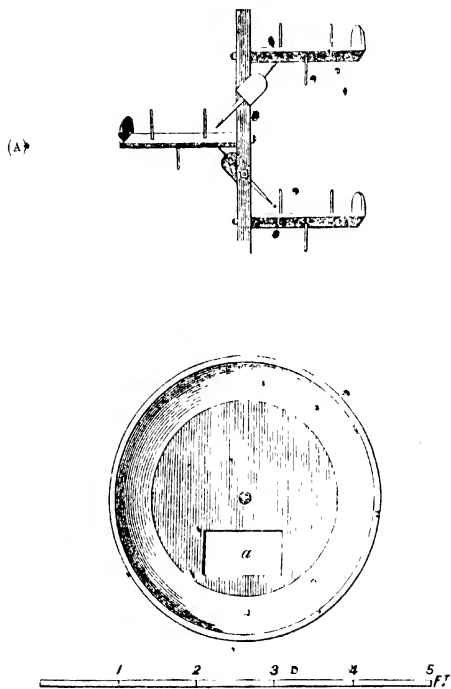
(A) Knives in pug-mill. (B) Cross-section of pug-mill showing ejectment hole (a).
